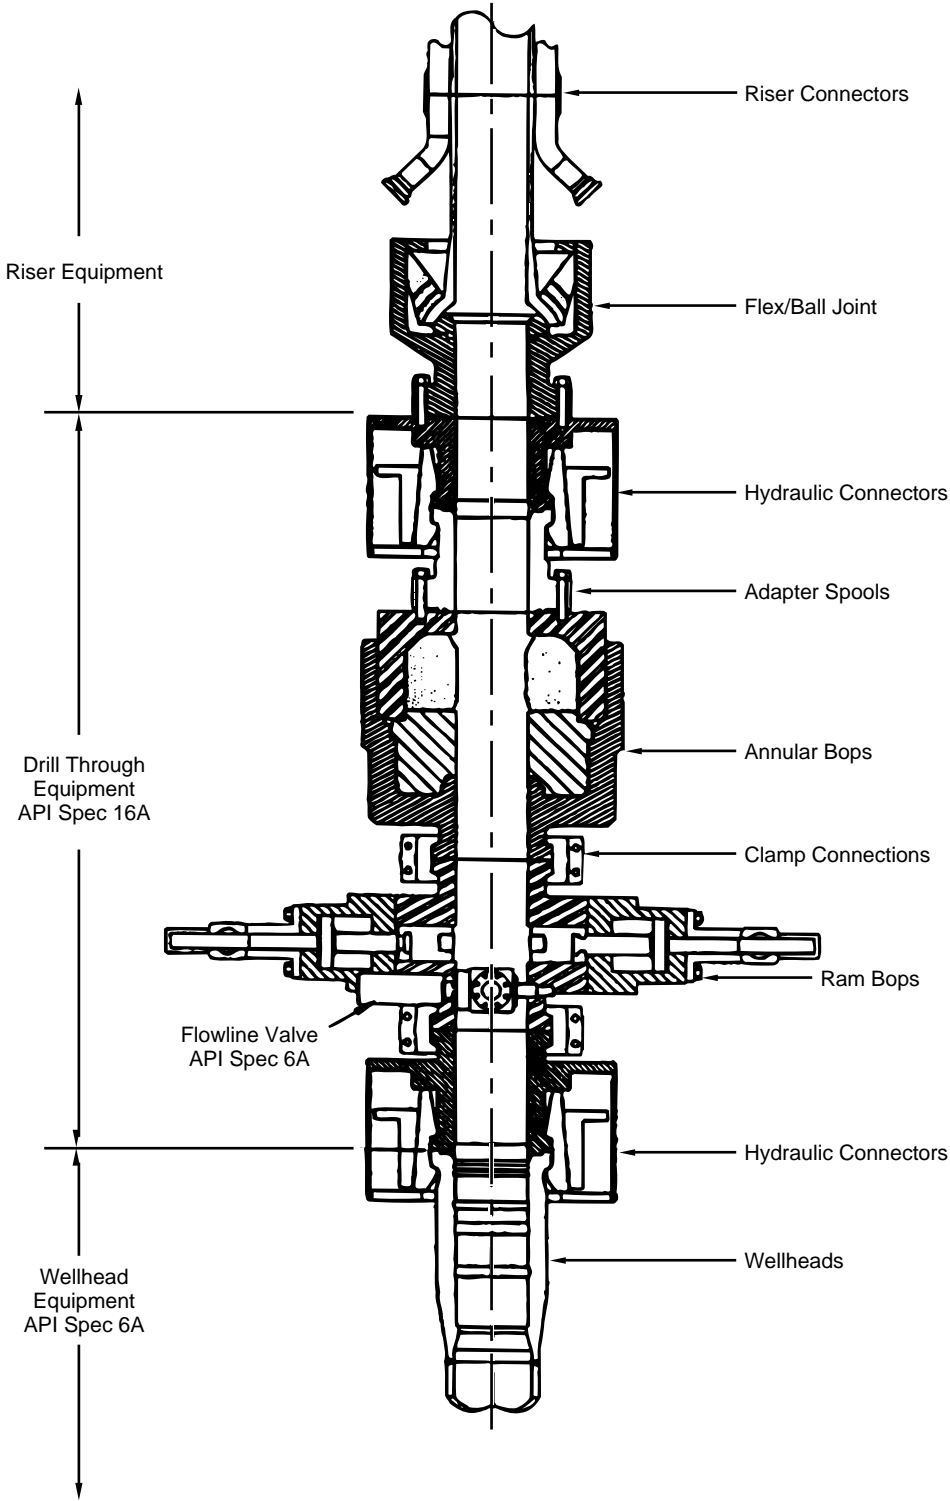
Drill Through Equipment (Typical Subsea Equipment)
